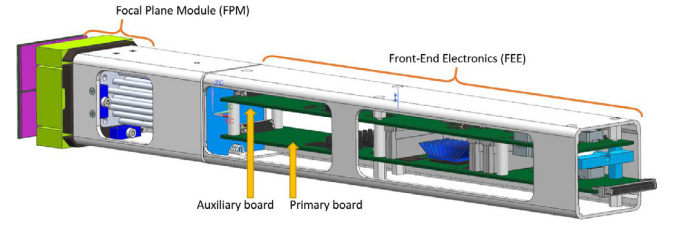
Schematic of the pSCT camera module divided into an FPM (front) and a FEE (rear) parts. Between the two, the peltier cooling is visible through the opening of the metal cage. Inside the casing, the FEE module is divided into an Auxiliary and a Primary board [4].
